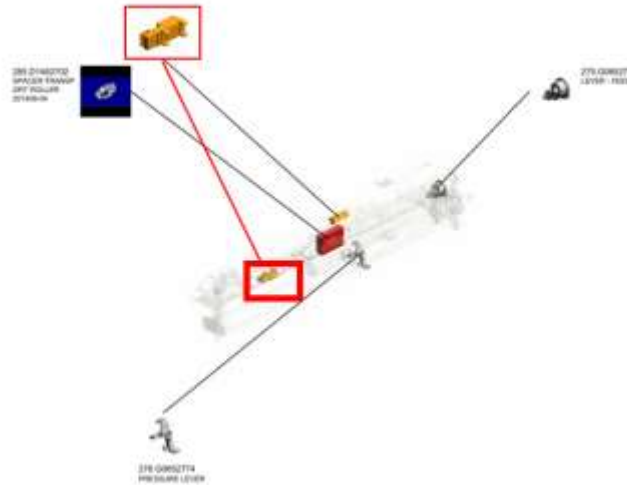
Position of the first paper reading photoelectric sensor in the paper picking assembly [6]
